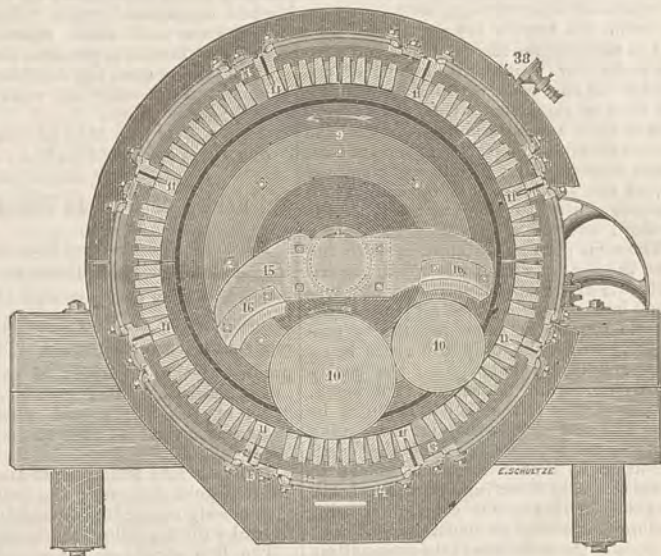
SECTIONAL VIEW THROUGH CENTER.
